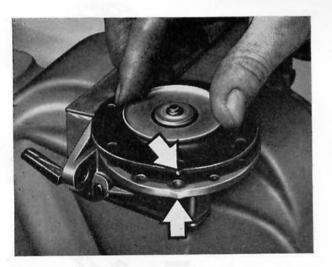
Assembling the diaphragm and rod assembly to the pump body. The assembly must be pressed down and turned through 90° to engage the rod with the rocker arm link and align the location tab on the diaphragm with the lug on the body, indicated by arrows
